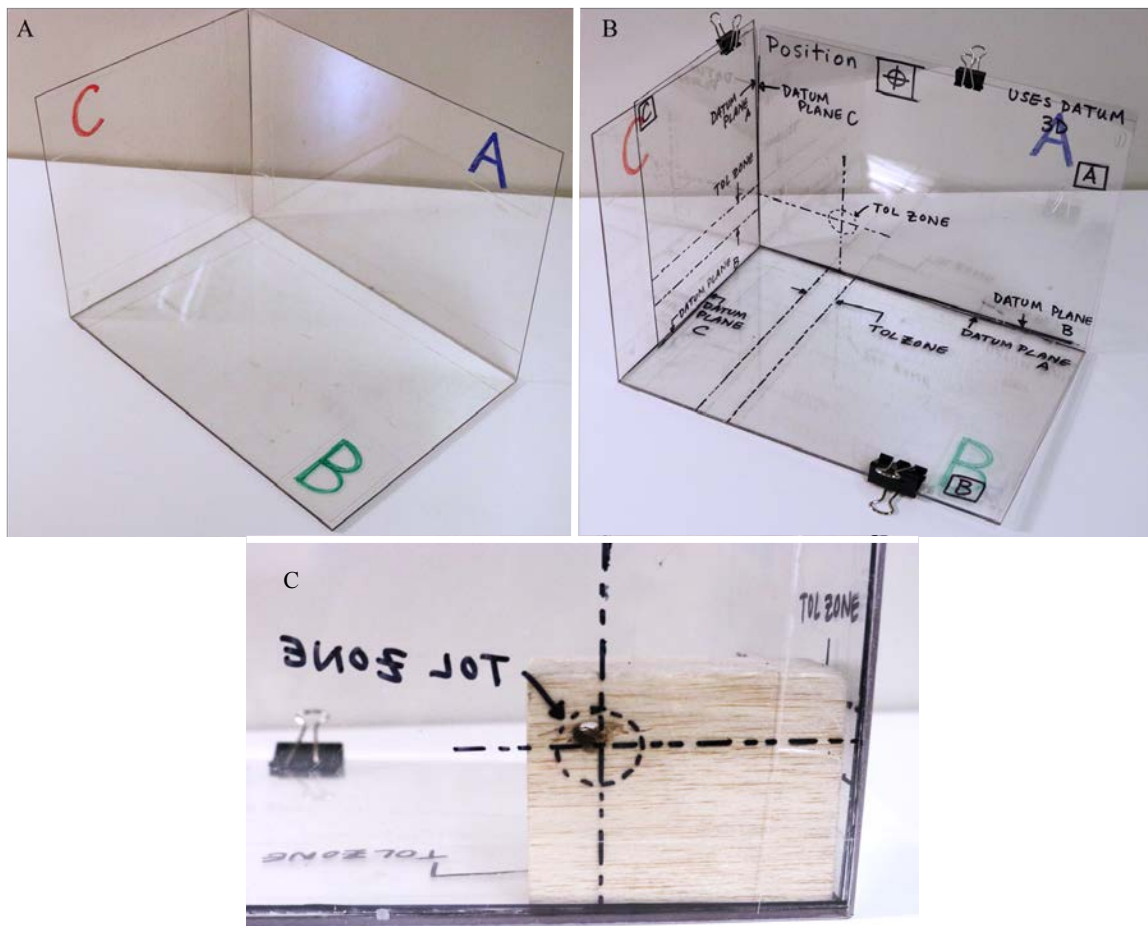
GD&T Spatial Learning Tool for Position Tolerance
